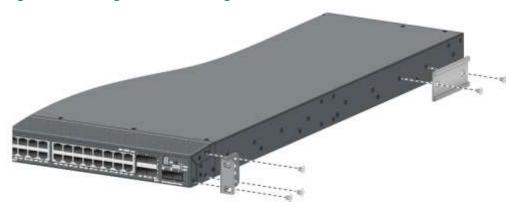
Attaching the front mounting brackets and the chassis rails to the chassis
